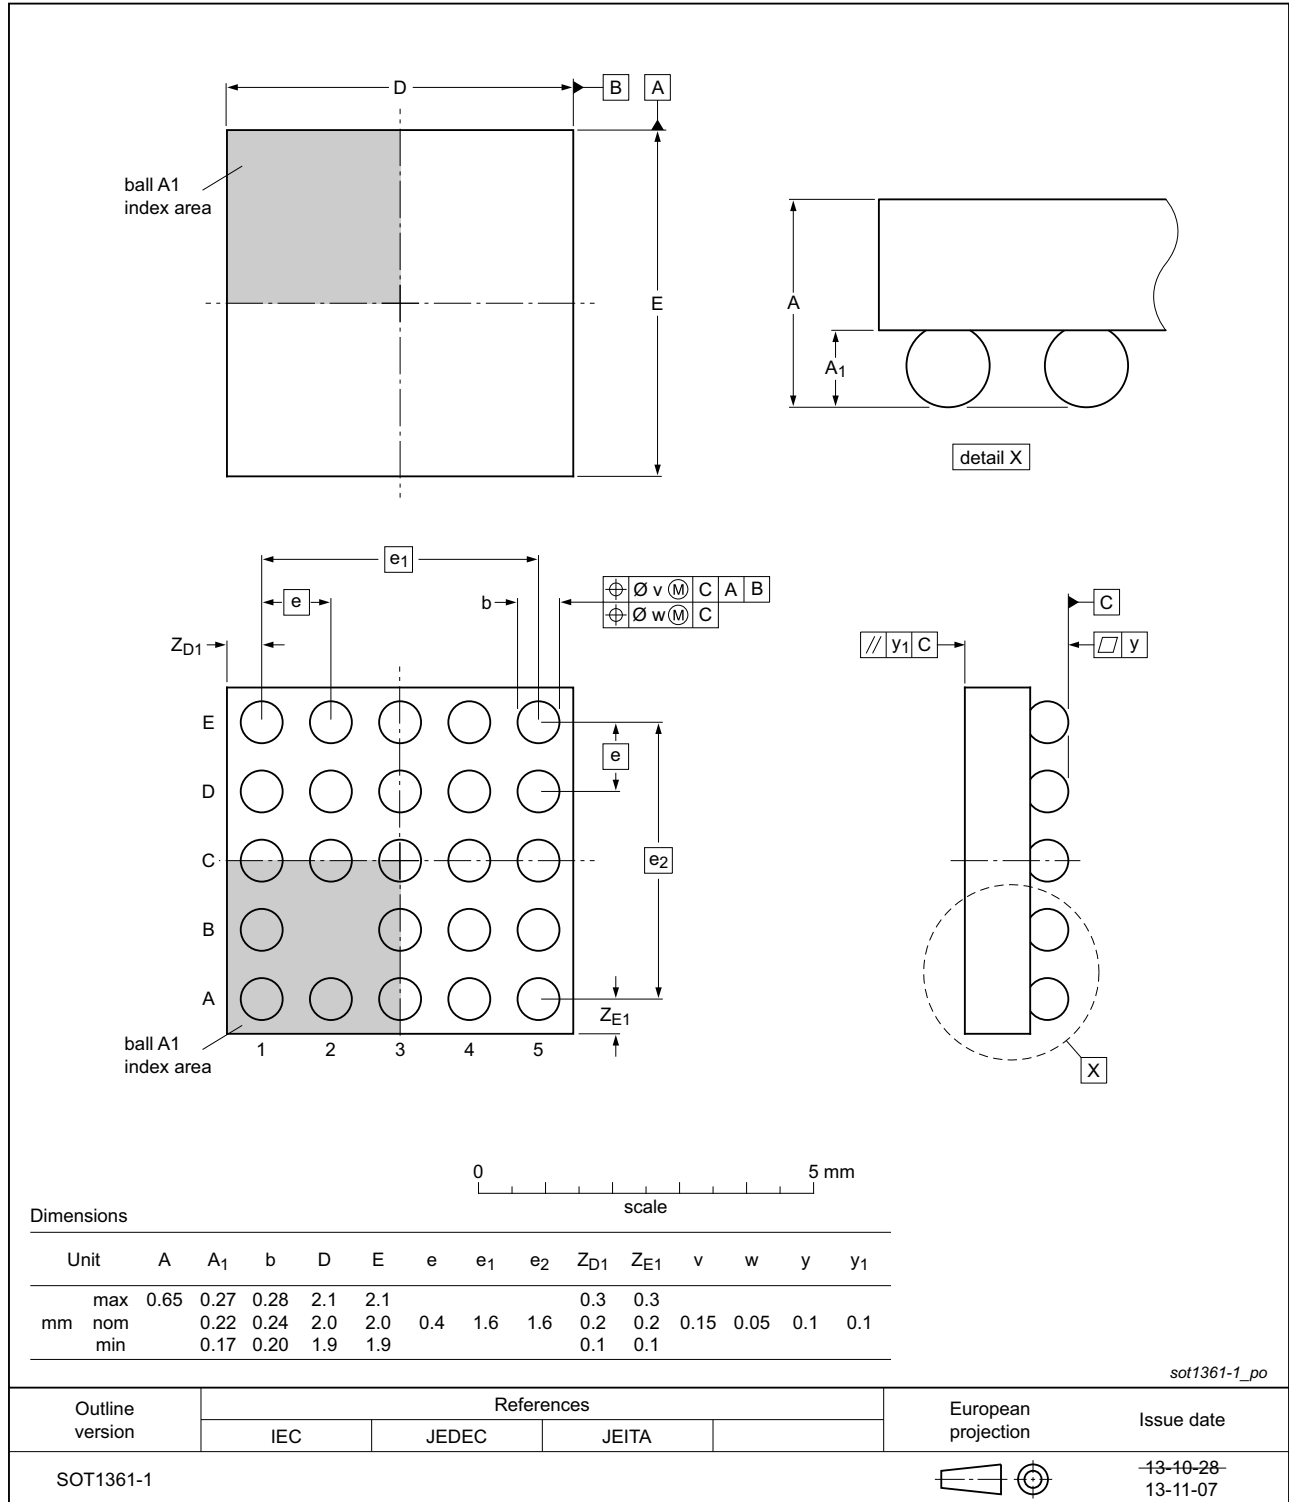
Package outline SOT1361-1 (UFBGA24); ER option
